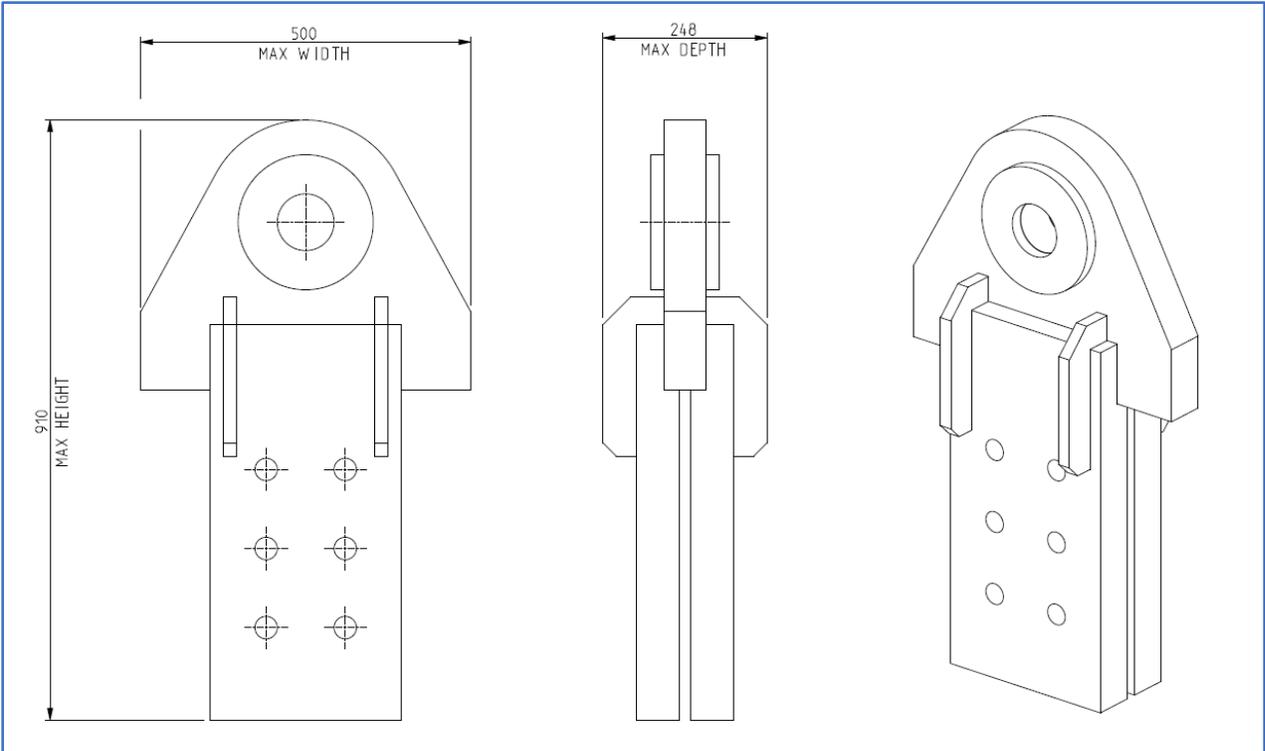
Site-Mounted Pad-Eye Dimensions
